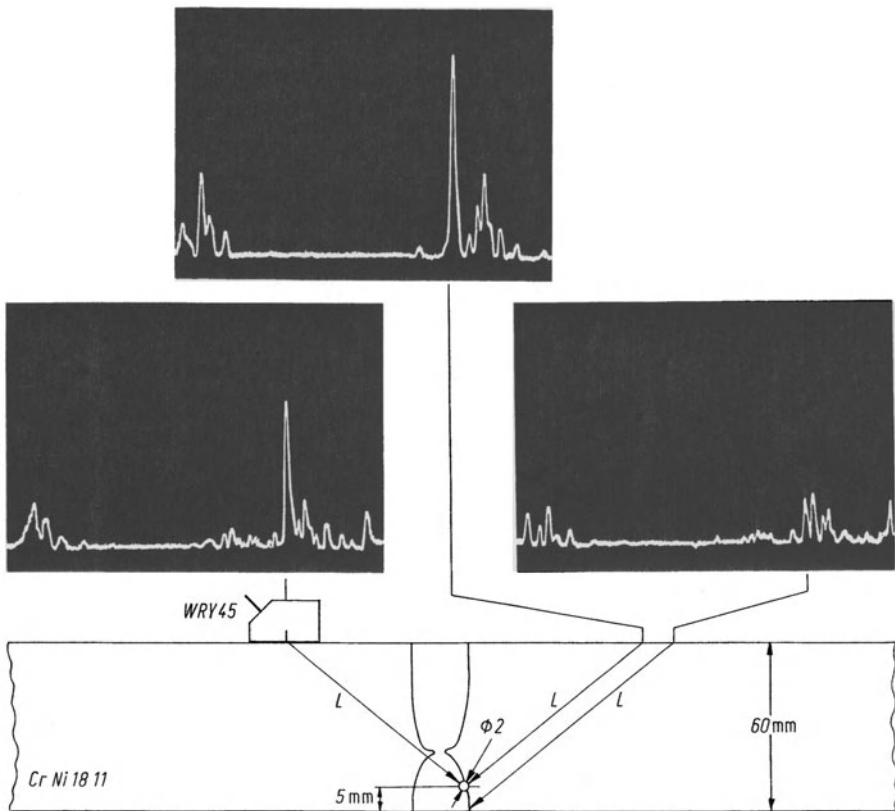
Interference between echoes from the side of an austenitic weld near the plate surface
